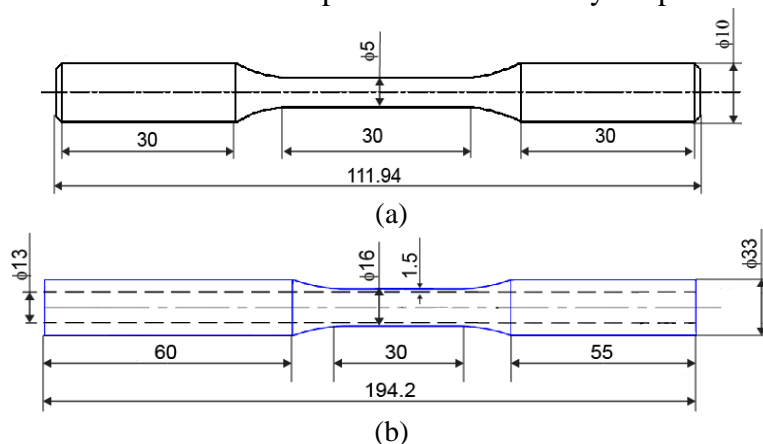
Drawing of (a) round solid specimen for uniaxial cycling tests; (b) thin-walled tubular specimen for biaxial compression-torsion stress cycling tests.
